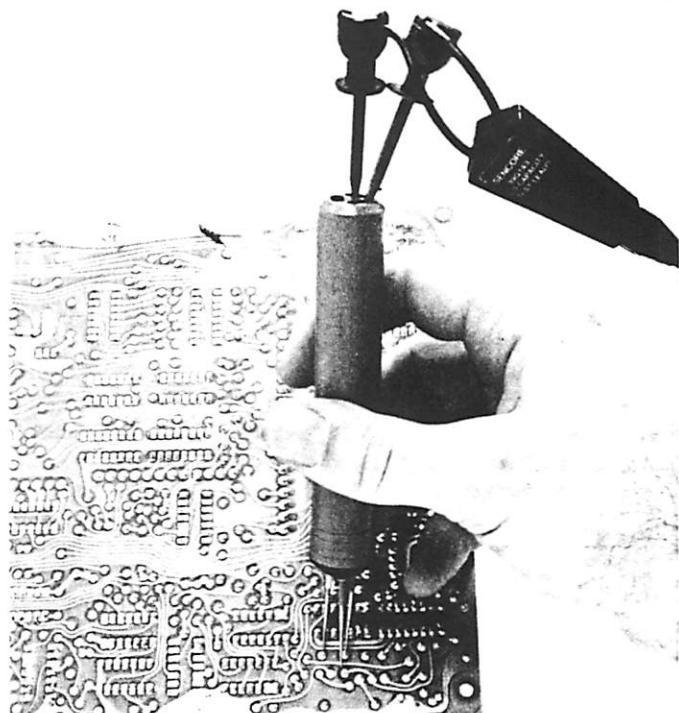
Use the optional touch test probe to measure inductors mounted on PC boards.
